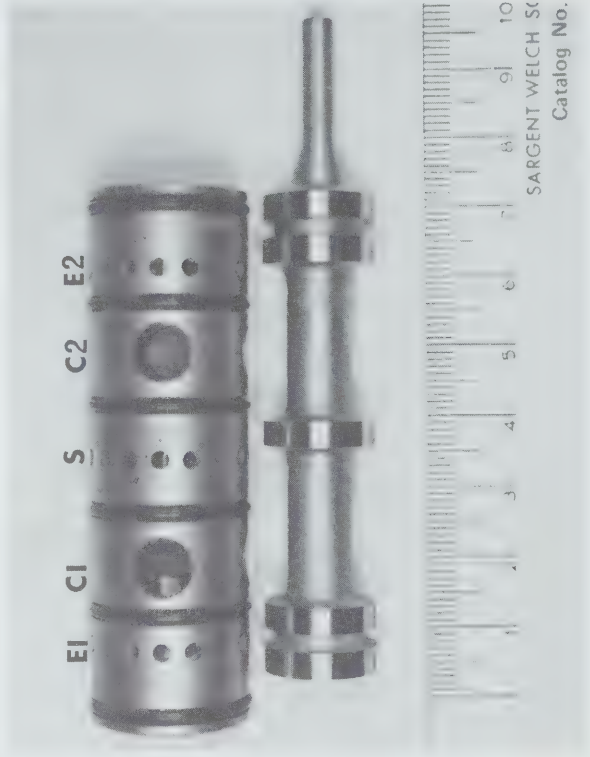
The sleeve and spool are shown separated but aligned, in the non-activated valve position. The relationship between the sleeve and the valve chambers is indicated by E1, C1, S, C2, and E2.
